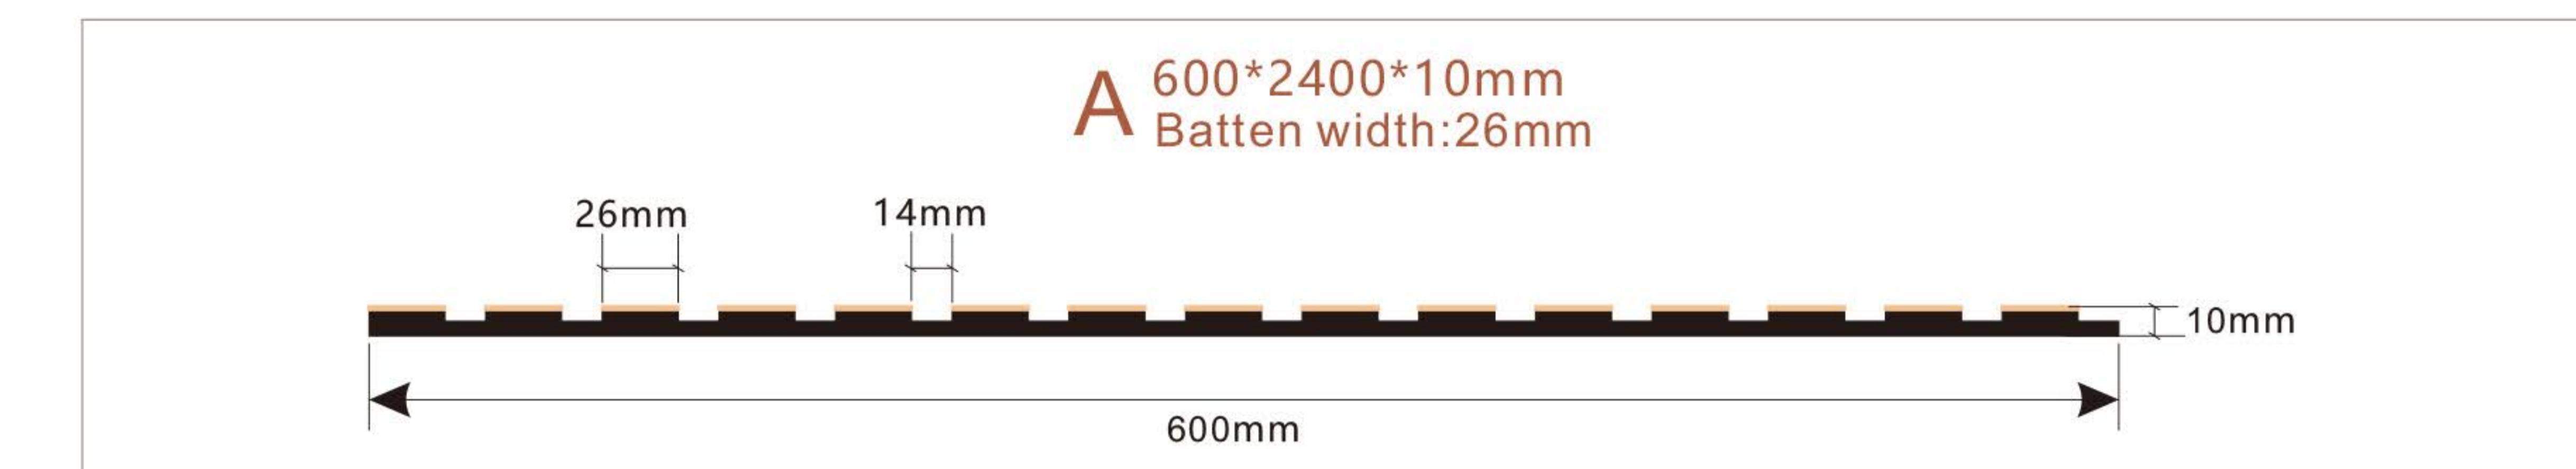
DETAILED DRAWINGS OF PRODUCT DIMENSIONS
